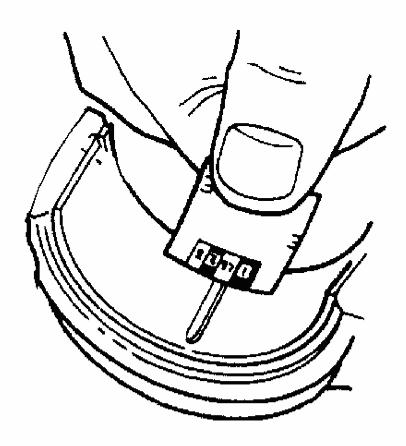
Measuring Plastigage Courtesy of GENERAL MOTORS CORP.
